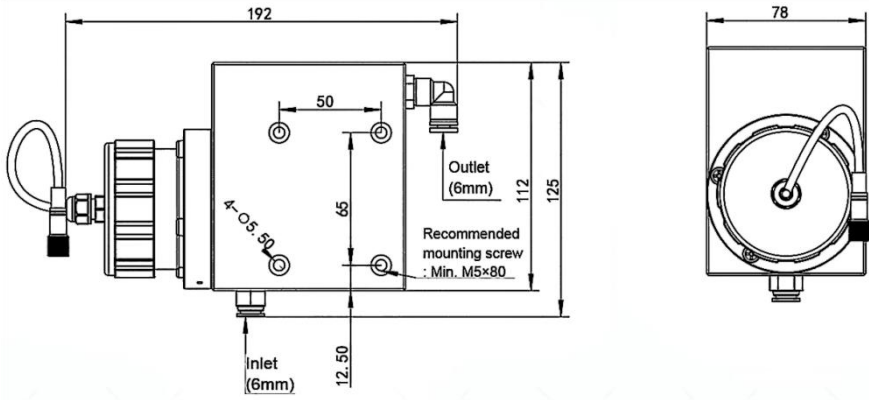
Low range quick-connect fitting dimensions (unit: mm)
